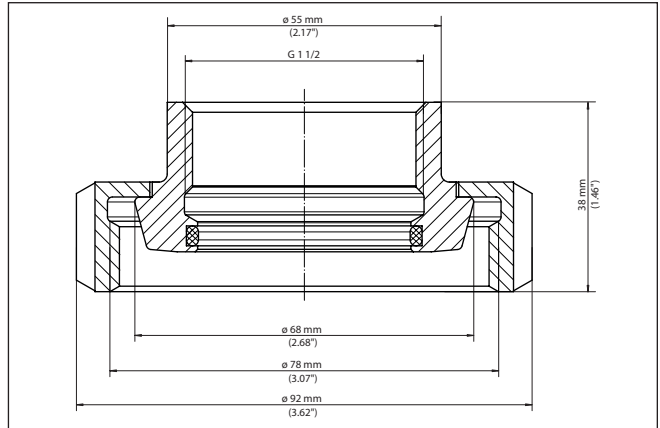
Dimensions of threaded adapter G1½ (DIN 3852-X) on slotted nut DN 50 (DIN 11851) PN 16
